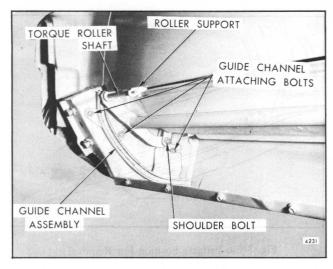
Tailgate Guide Channel Assembly - Left
